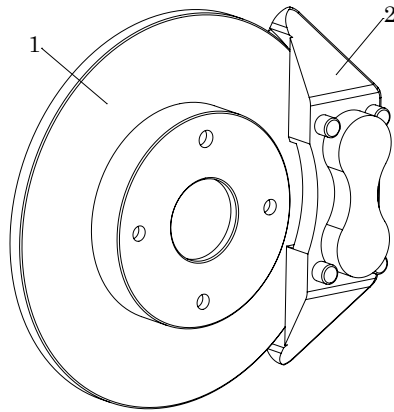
Illustration of a modern type of disc brake: 1) brake disc, 2) caliper.
